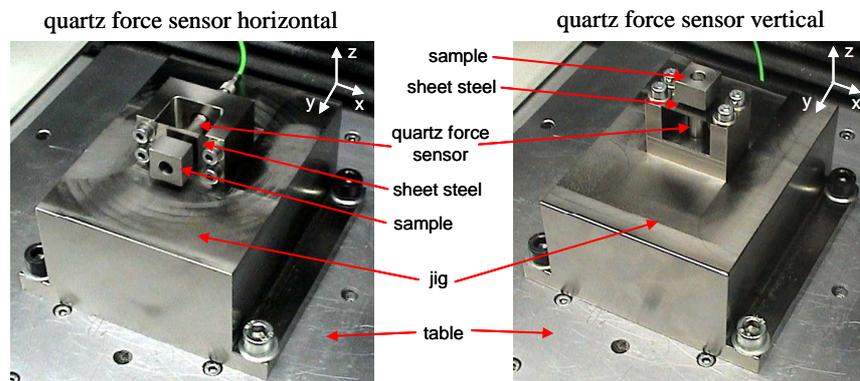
Improved Prototypes of a force measurement system of the LaFT
